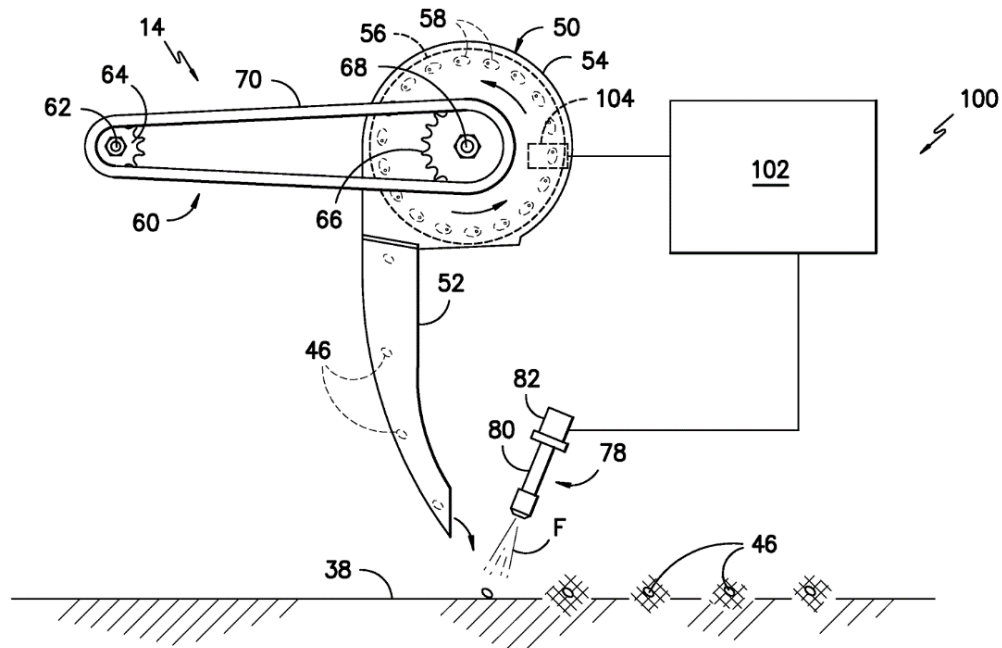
(above): The seed tube and sprayer layout of Capstan's Seed Squirter
